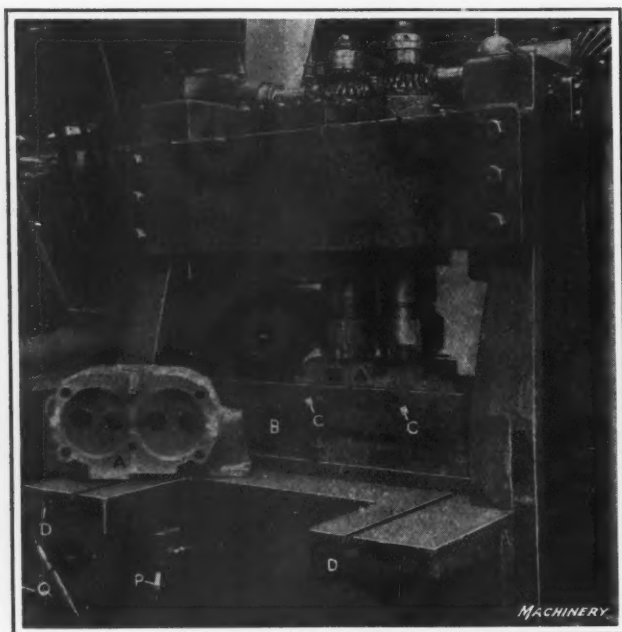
Close-up Front View of Special Machine for boring Combustion Chamber in Avery Cylinder Heads
